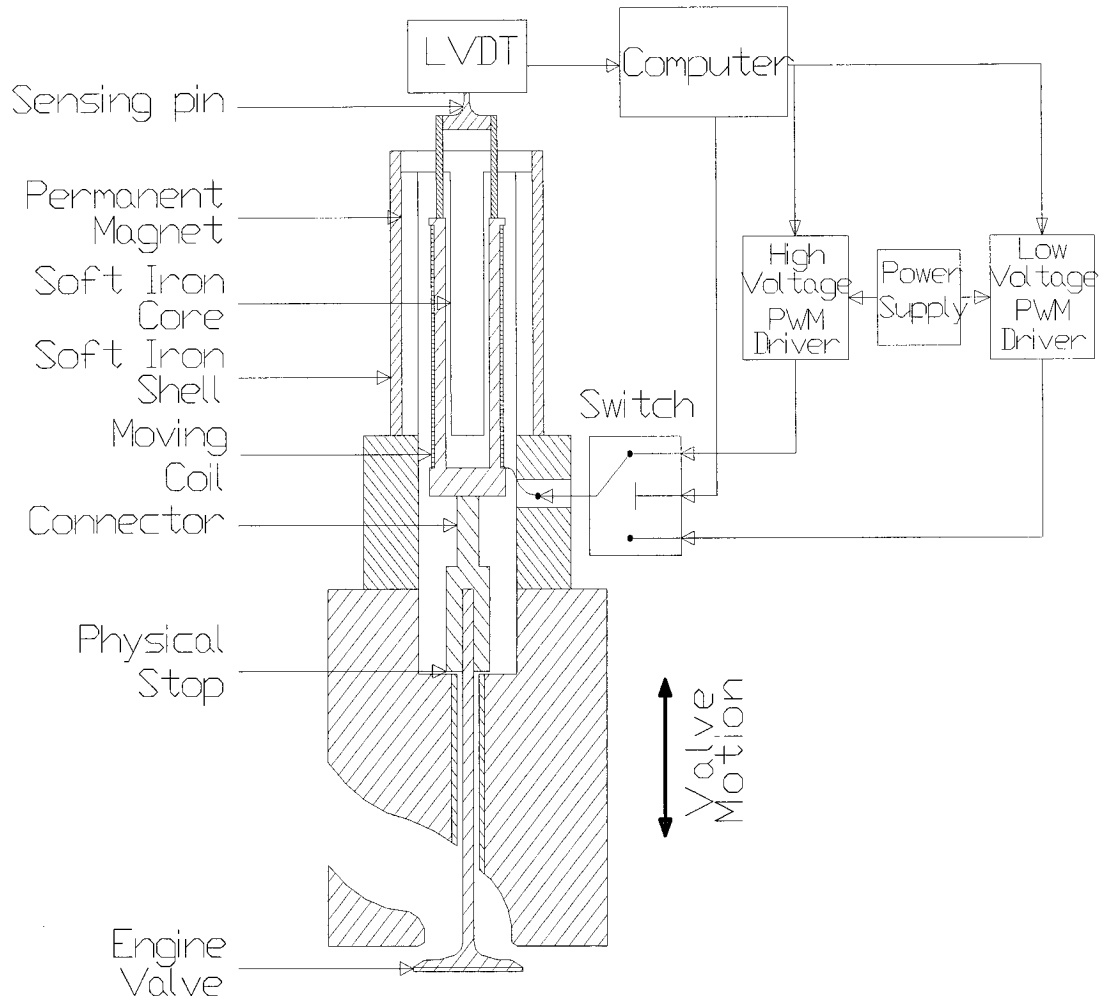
VCA assembly - engine valve and feedback loop.
